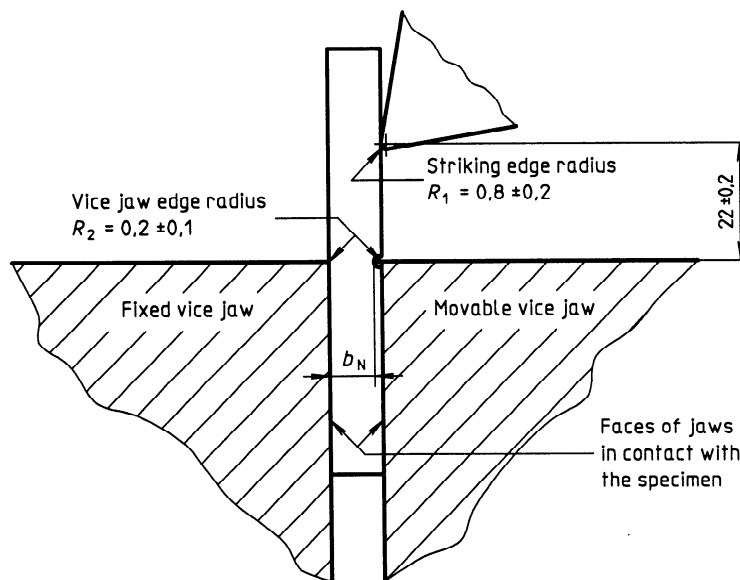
Vice support, test specimen and striking edge shown at impact of notched specimen
